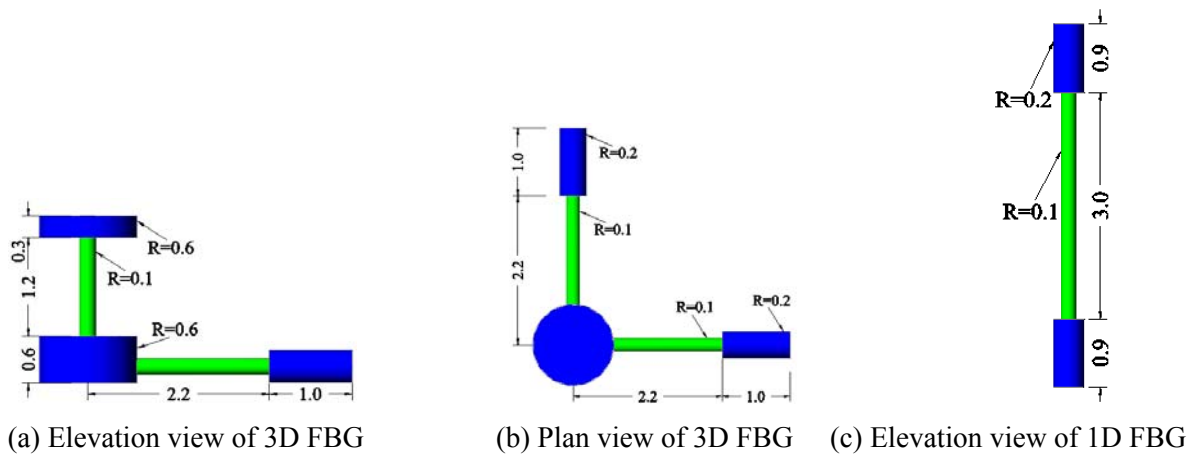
Configuration and geometry of FBG sensors (in inch = 2.5 cm).
